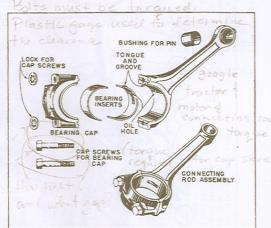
CONNECTING ROD ASSEMBLY
